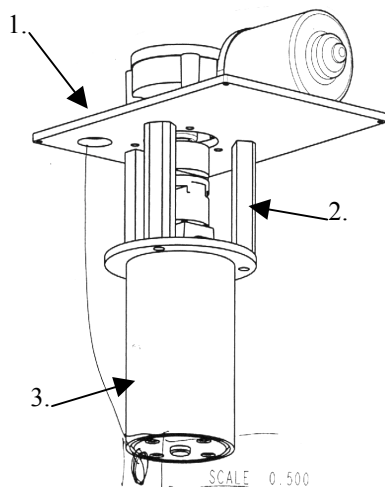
Stay solution: 1; motor bracket, 2; Stay, 3; Kingpin bearing housing.
